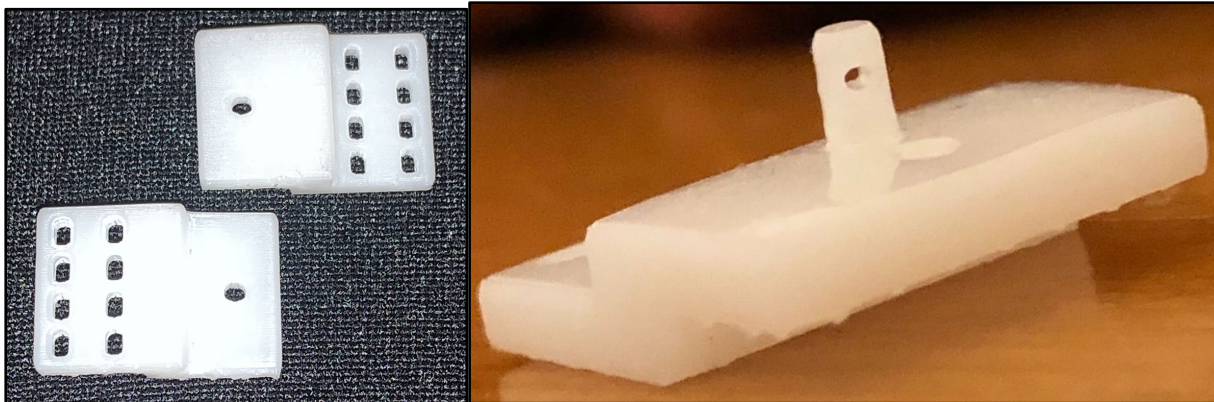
(Left) First prototype of the clasp. The singular holes stack together for Nichrome wire to be threaded through during attachment. (Right) The second prototype was slightly wider (1.5 mm) but more significantly featured a way for the wire to be looped off and secured upon deployment.
